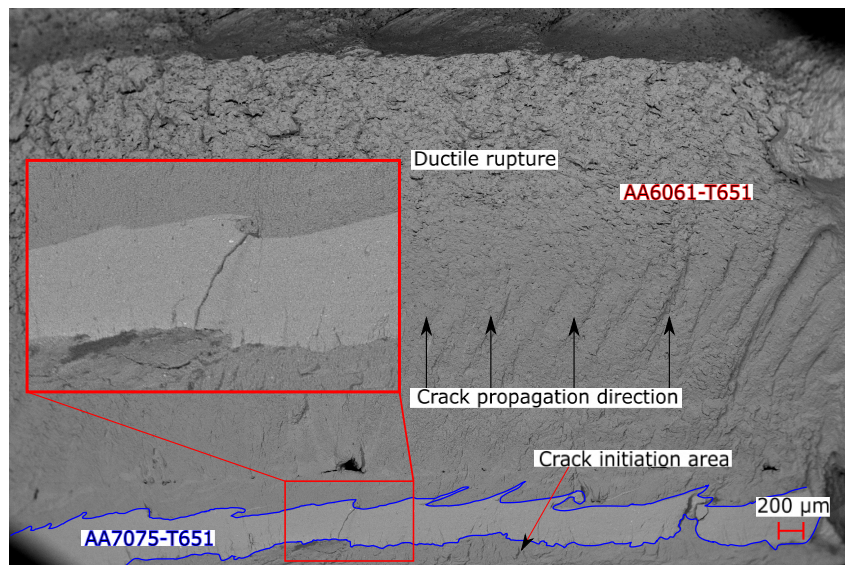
BSE imaging of the fracture surface of a reference AA6061-AA7075 400 RPM, 120 mm/min, 10 kN welded joint. The stir zone is distinguishable in the crack propagation plane and both Al alloys are visible, meaning fracture happened exactly between the two plates. Also, holes are visible at the bottom of the apparent stir zone.
